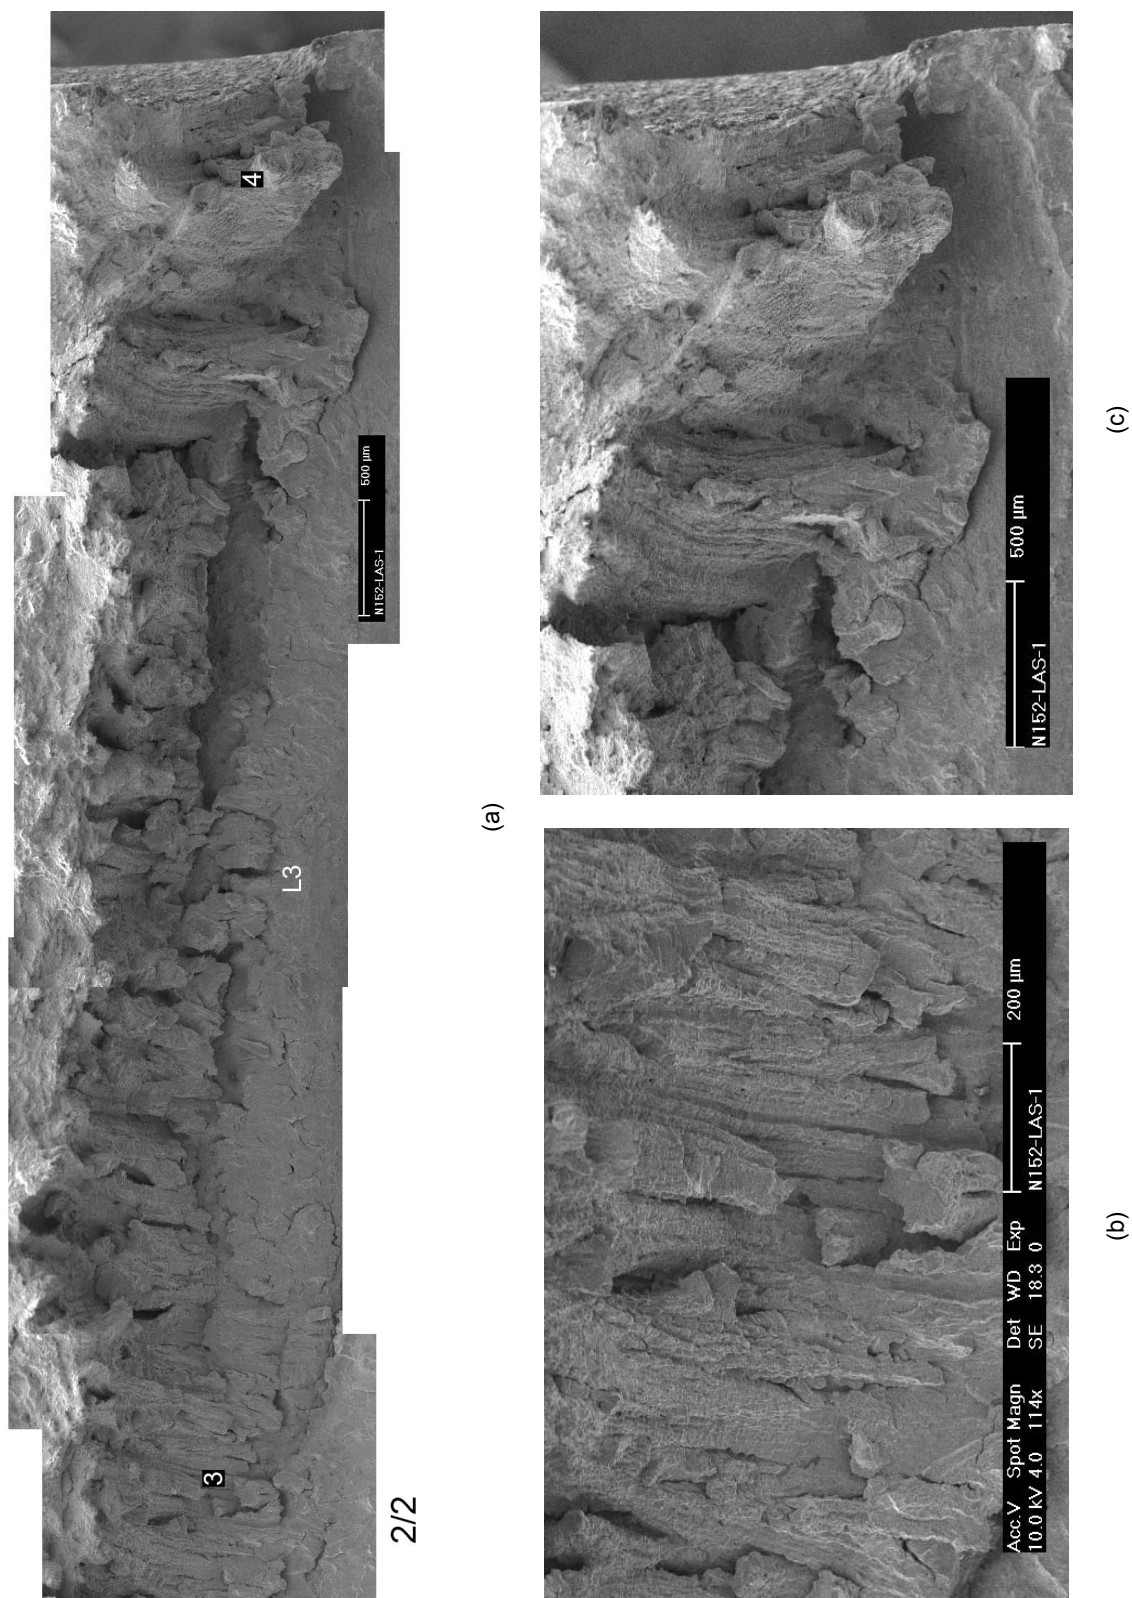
Fracture surface of N152-LAS-1, region IG-2 (Fig. 3-64): (a) second half of the fracture surface, (b) detail at location 3, and (c) detail at location 4. Crack advance is from bottom to top.
